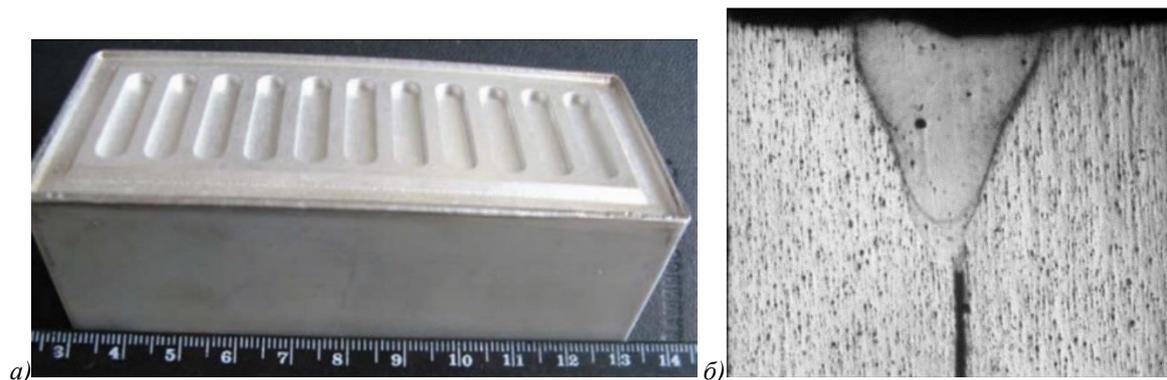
Examples of application of laser and hybrid welding with non-through penetration: a) – external appearance of a fragment of the battery case made of aluminum alloy AMg6, 0.8 mm thick, connected by laser welding [55]; b) – macrostructure ($\times 25$) of the cross-section of the end joint of AMg6 alloy ($\delta=1.4$ mm), made by hybrid laser-plasma welding at a speed of 168 m/h [54].
